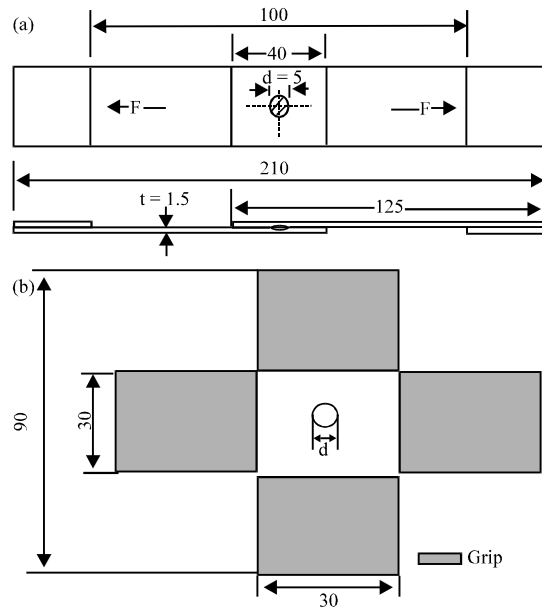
Geometries and dimensions of the SPR specimens: a) Tensile-shear and b) Cross-tension
